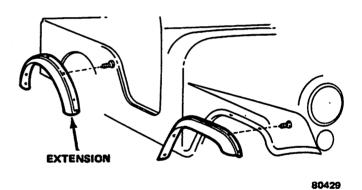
F-14 Fender Extension—CJ and Scrambler Models
